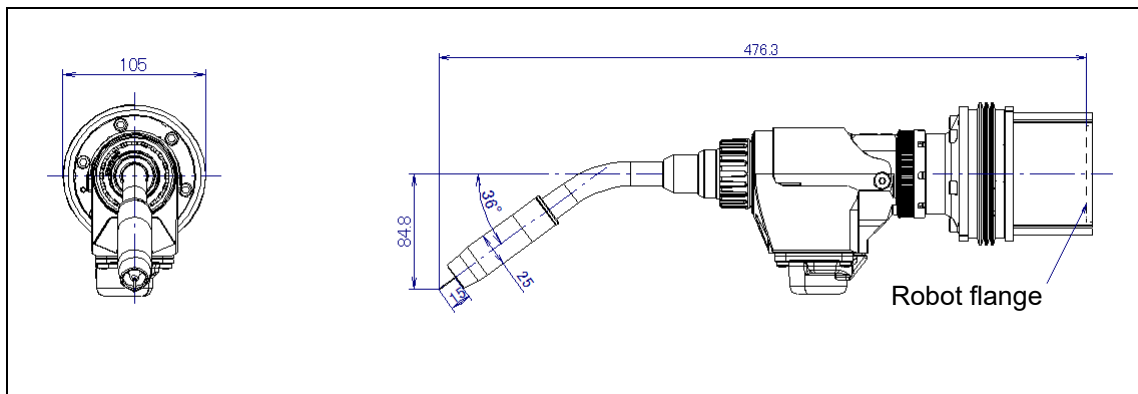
(b) MTB500i W R/36° external dimensions
